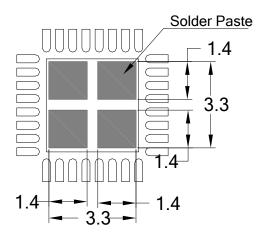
PD69200 Top layer Solder Paste and Vias Recommended PCB Layout for Thermal Pad Array (mm)
